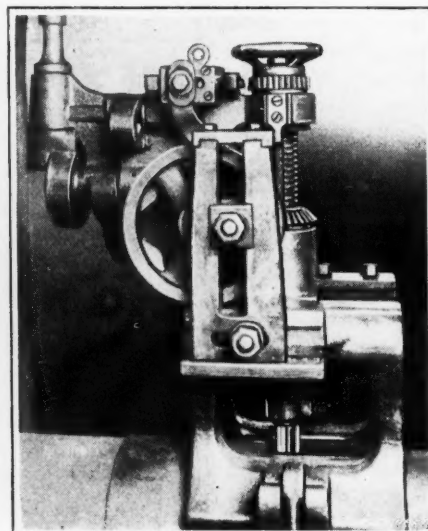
Close-up View of Keyseating Machine shown in Fig. 11
